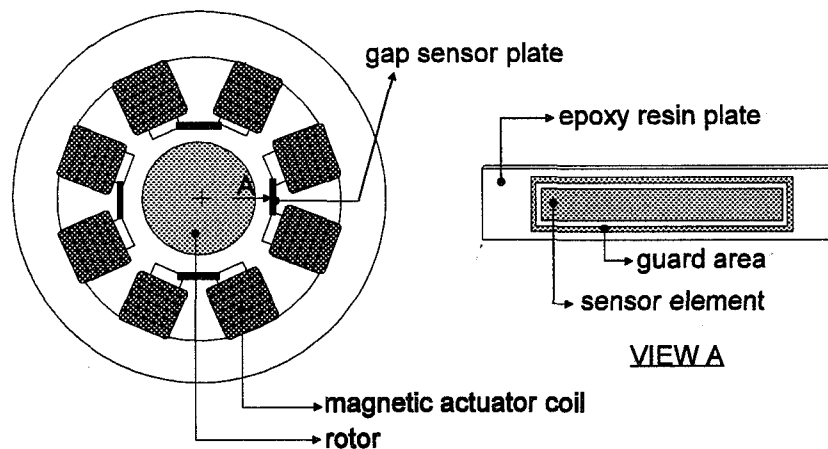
Cross section of the magnetic bearing and the overall shape and location of the gap sensor plate.
